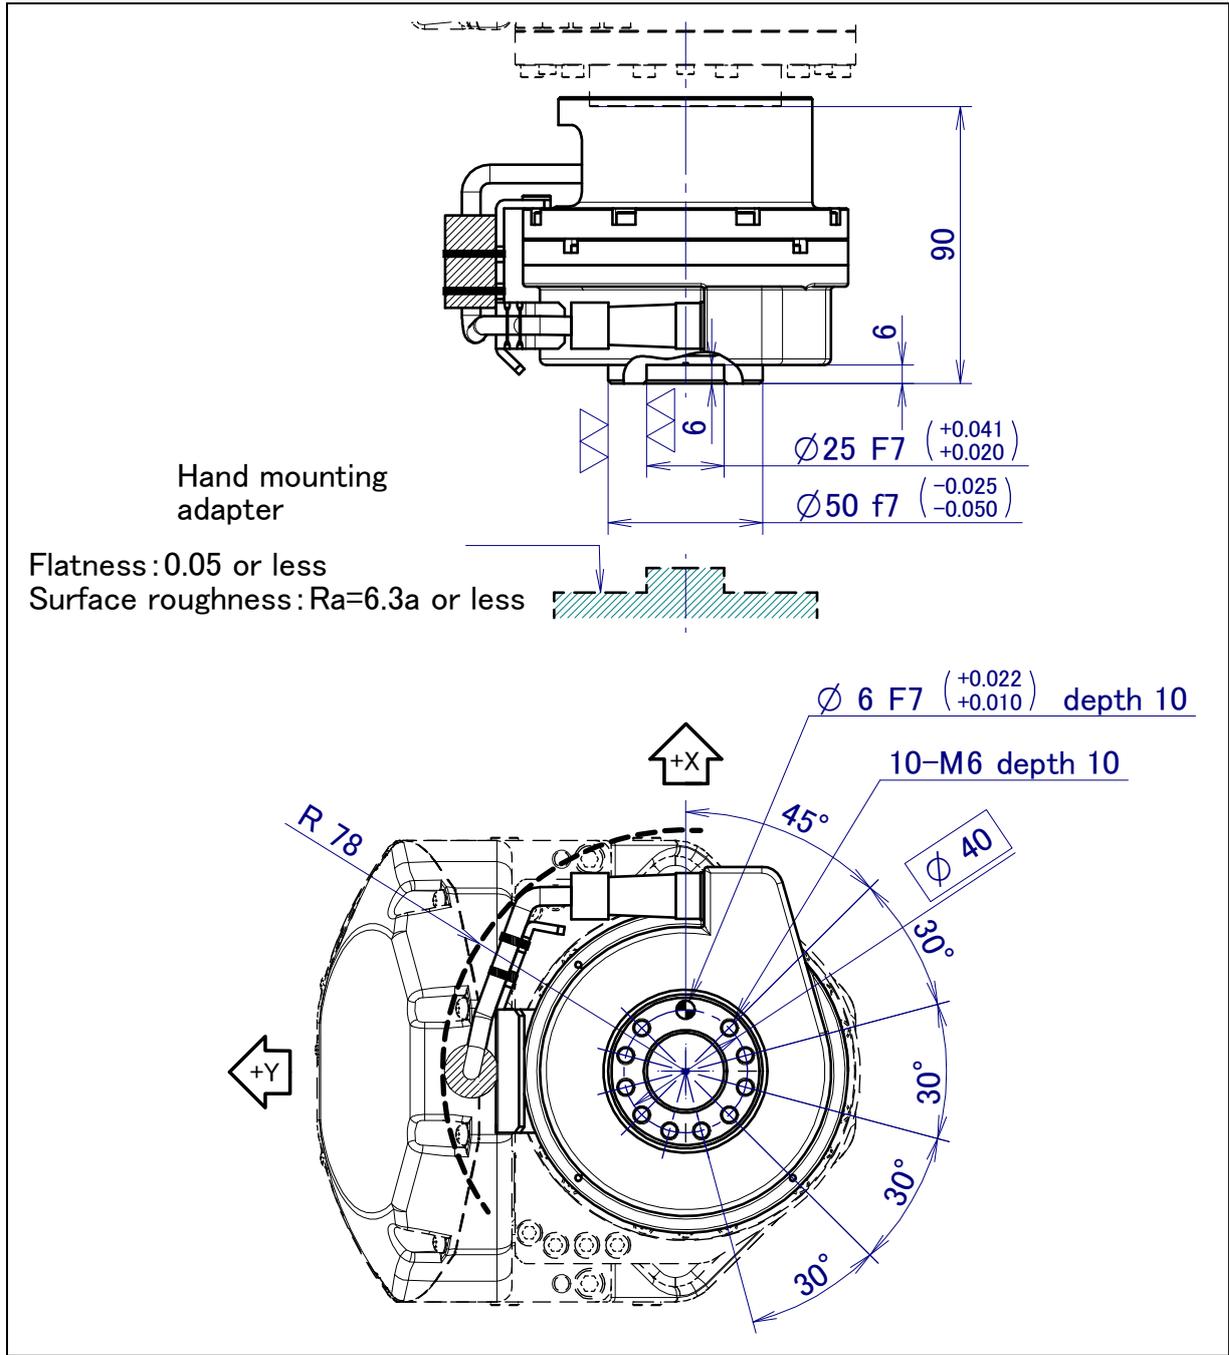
(b) Wrist section end effector mounting surface (FS-40iA)
